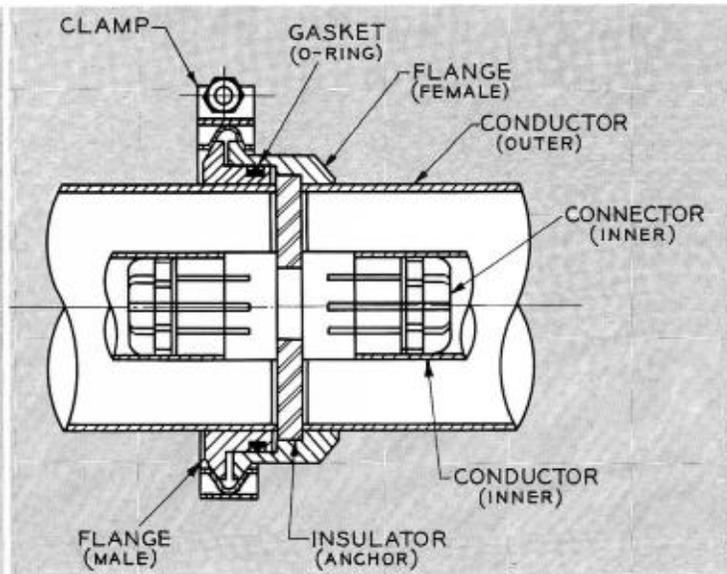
This is a cutaway drawing showing the flanged connector assembly of the Universal Transmission Line.
